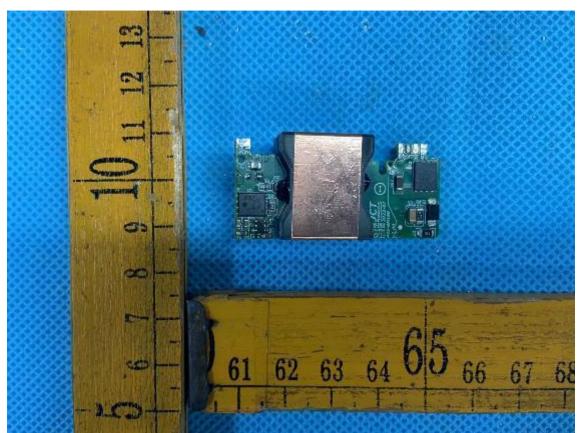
Top View of Transformer (for model: P05-BM160-L6)
